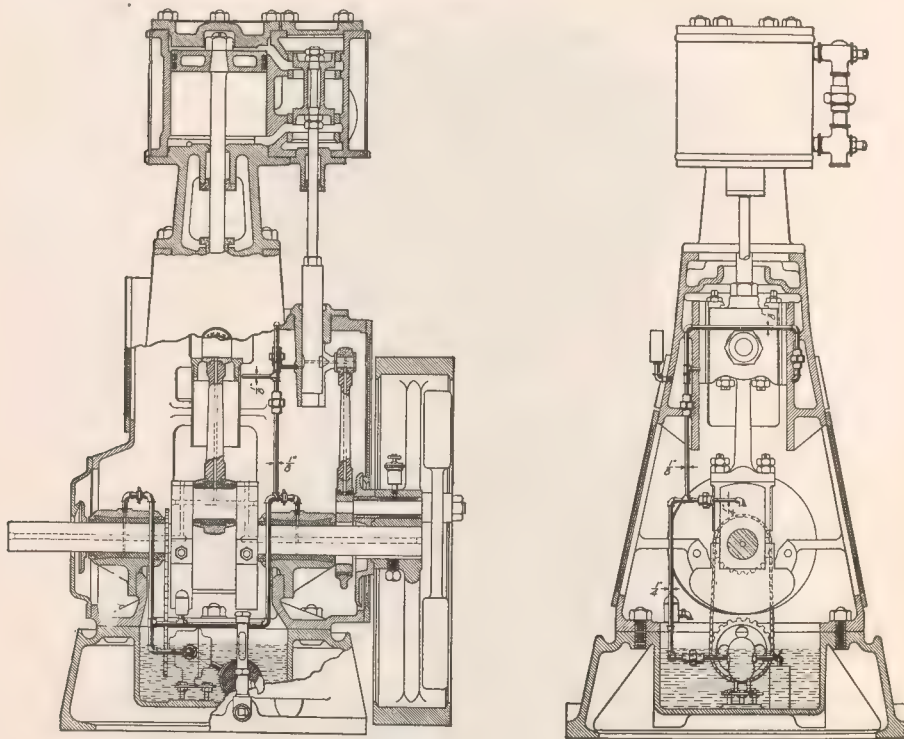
Sturtevant Fan Engine, Forced Lubrication.
